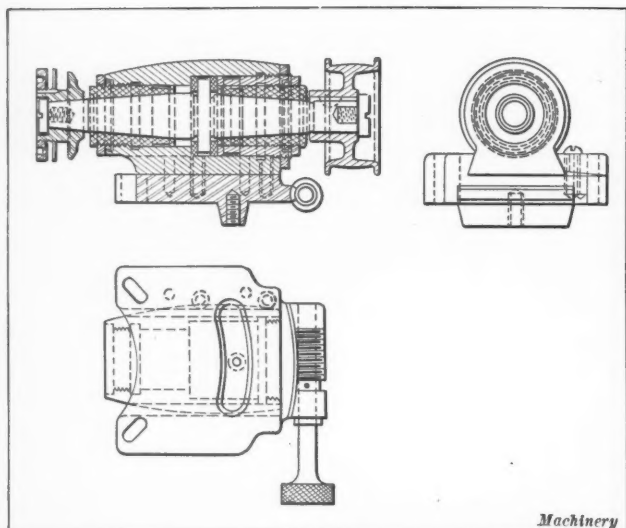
Arrangement of Grinding Wheel Spindle Bearings and Head
